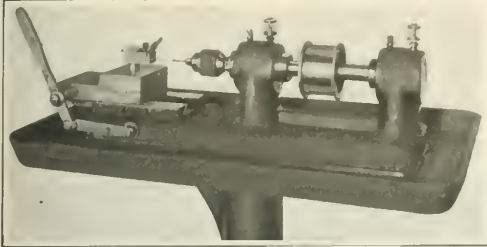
National-Acme Style D Single-spindle Drilling Machine
